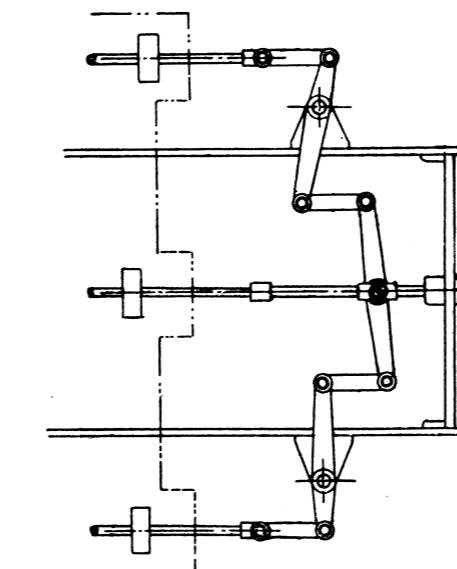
Valve Gear suitable for 3 Horizontal Cylinders.
